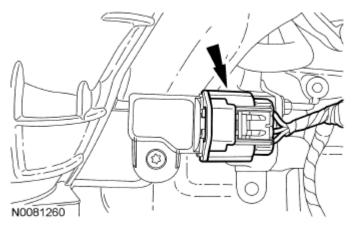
Locating Manifold Absolute Pressure Sensor Electrical Connector Courtesy of FORD MOTOR CO.
